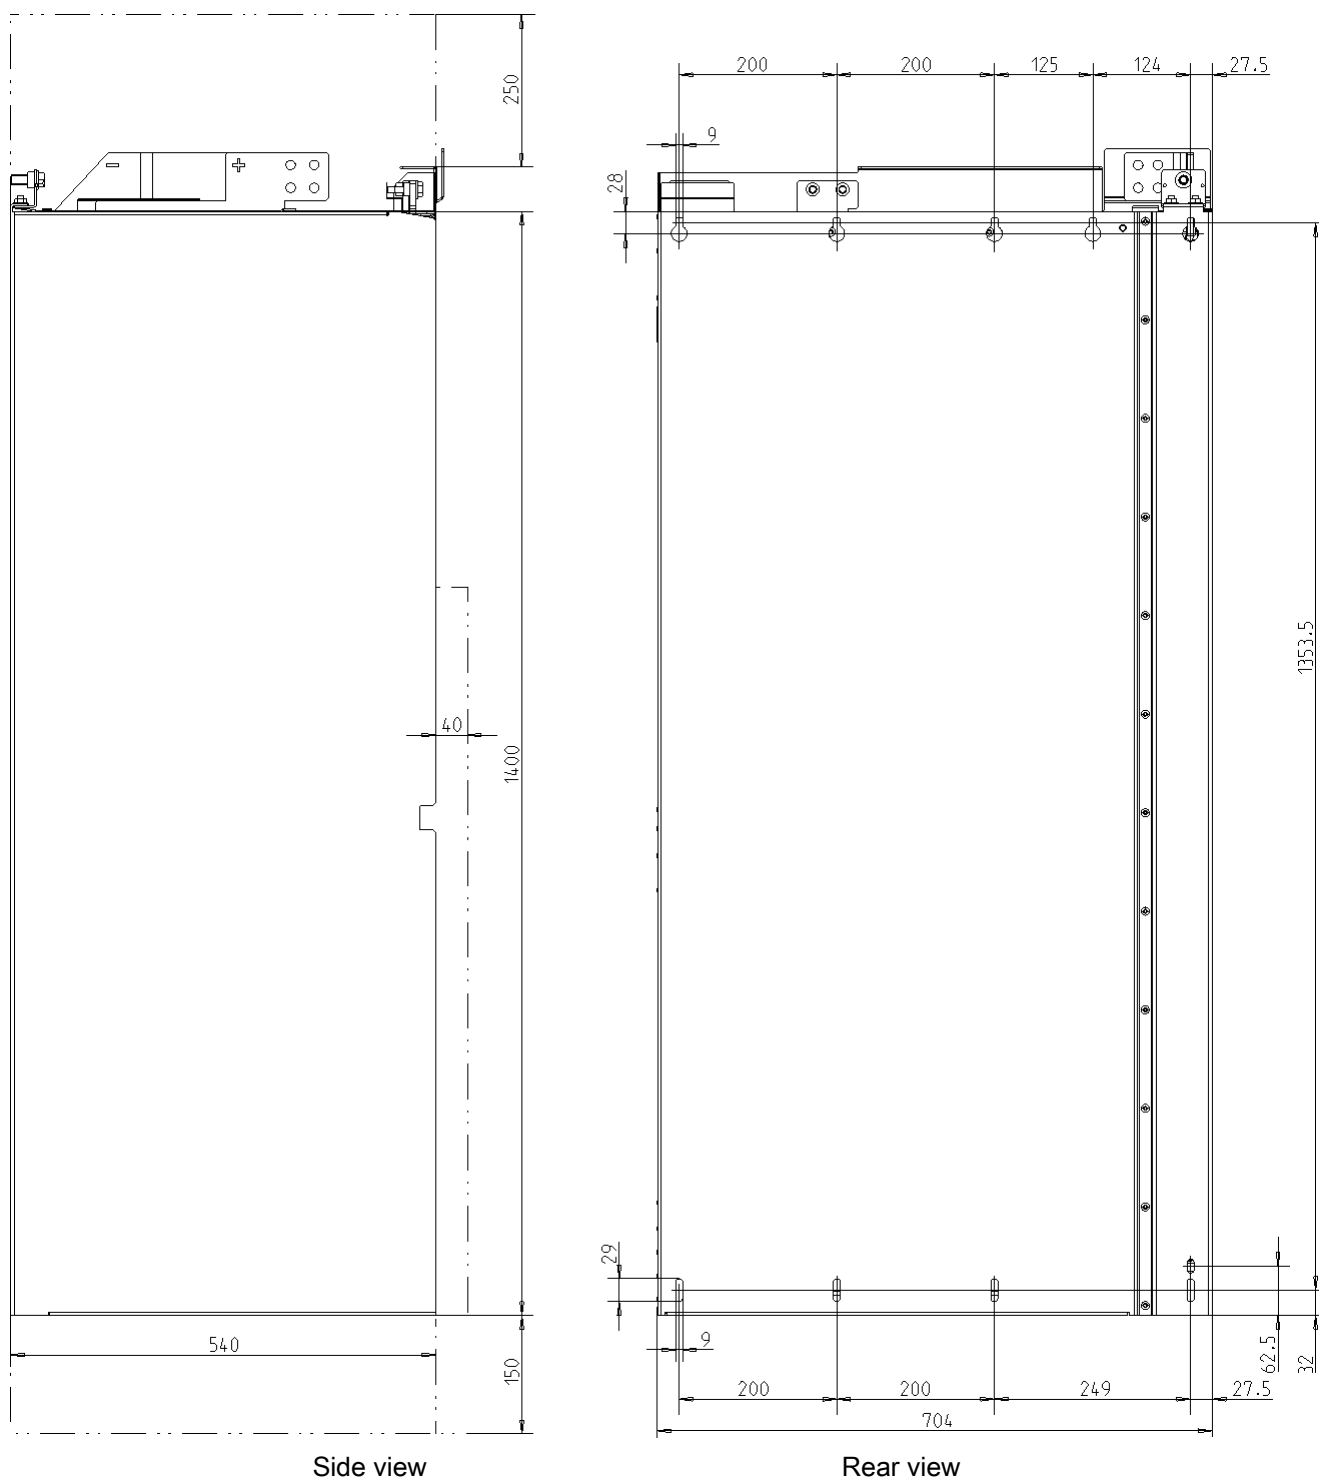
Dimension drawing of Active Line Module (type JX)
